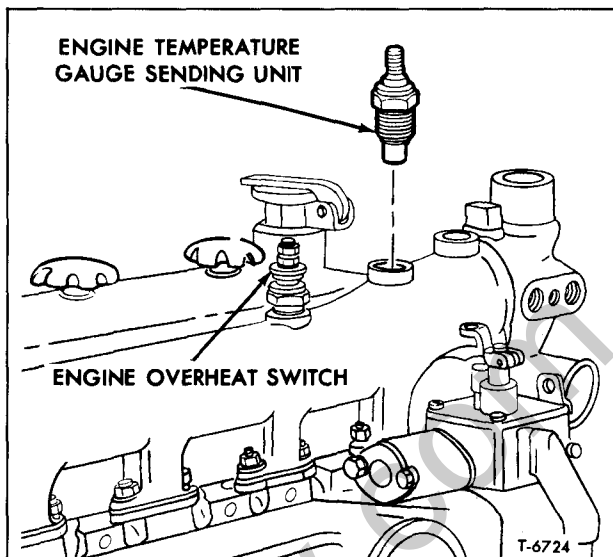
Temperature Gauge Sending Unit and Engine Overheat Switch (6-71 Diesel Engine)
